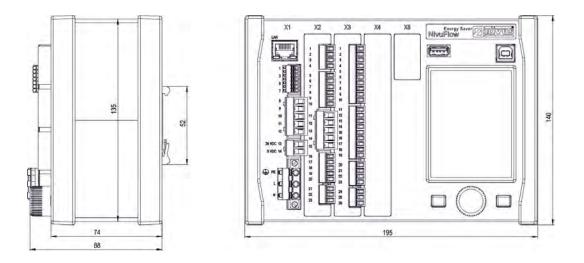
Dimensions of NivuFlow enclosure type E0
